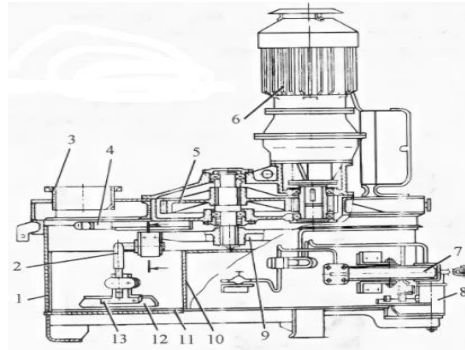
Rotary mixer: 1-outer shell; 2- brackets; 3-loading branch pipe; 4-perforated water pipe; 5-reducer; 6-electric motor; 7-pneumatic cylinder; 8-sector shutter; 9-traverse; 10-inner glass; 11 replaceable wear plates; 12-blades [2].
